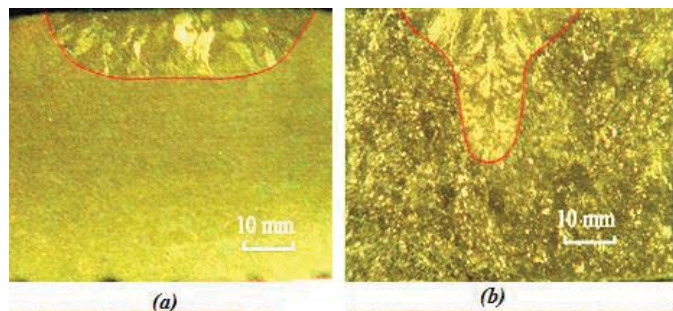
Weld shape in (a) TIG and (b) A-TIG welding [2].
